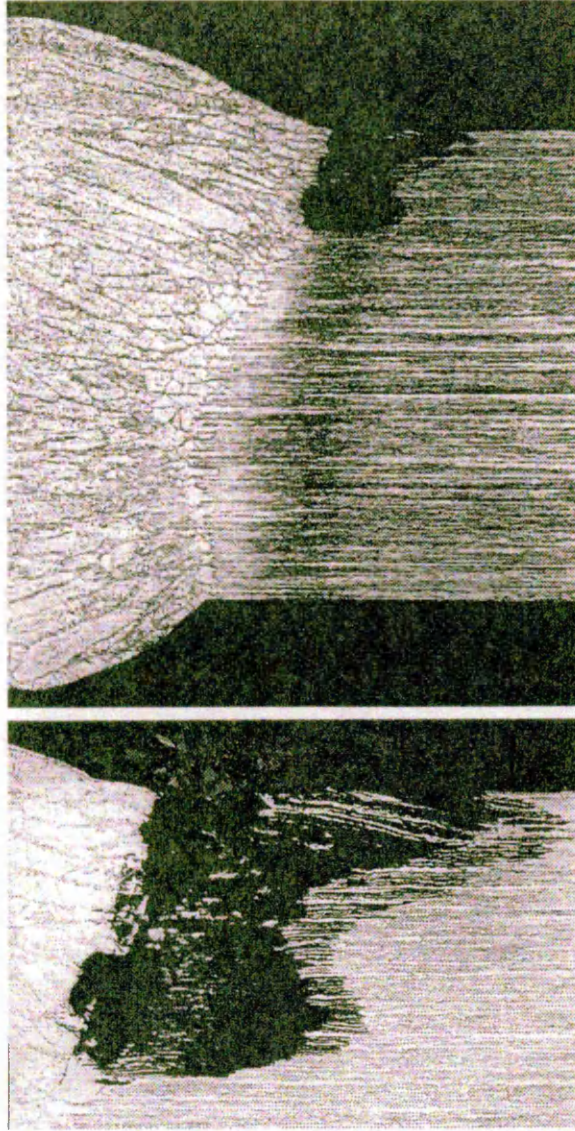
Pitting in the HAZ of a laser weld tested in 150ppm NaCl solution at 90°C (top image x 35 & bottom x 130)⁵⁵
